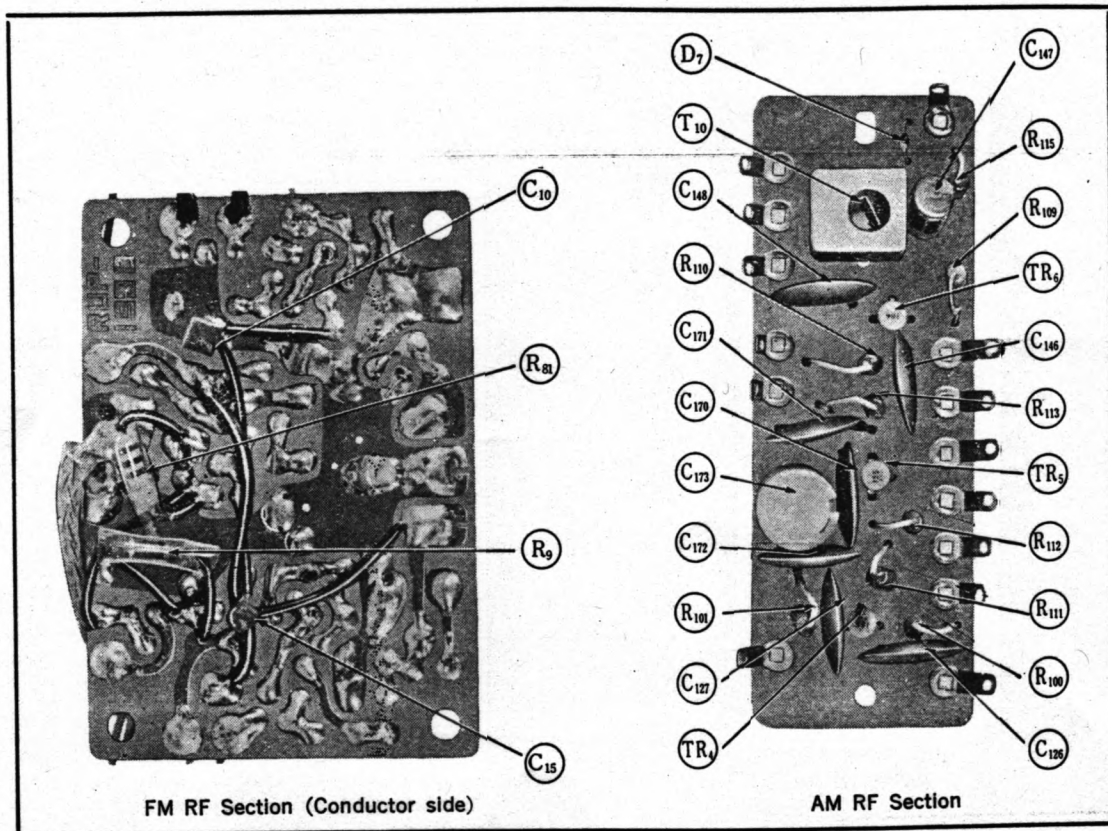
Component View - Parts Identification, FM & AM RF Section.
